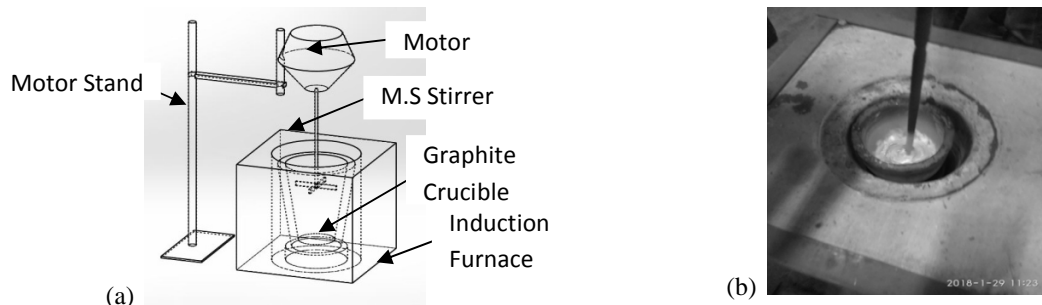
(a) Stir casting setup outline made in a SOLIDWORKS. (b) Stirring of molten metal (real image)
